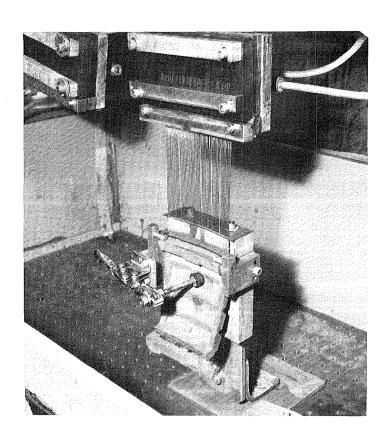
Typical Setup for Electro-Chemical Machining of Counter-Parallel FINWALL® Cooling Holes
